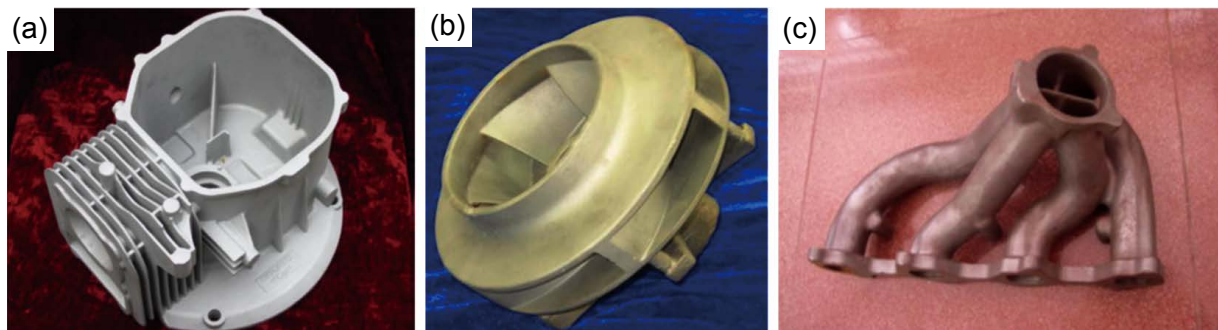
Casting prepared by SLS combined with investment casting: (a) cylinder block of motorcycle engine; (b) stainless steel pump wheel; (c) vehicle exhaust pipes [54]
